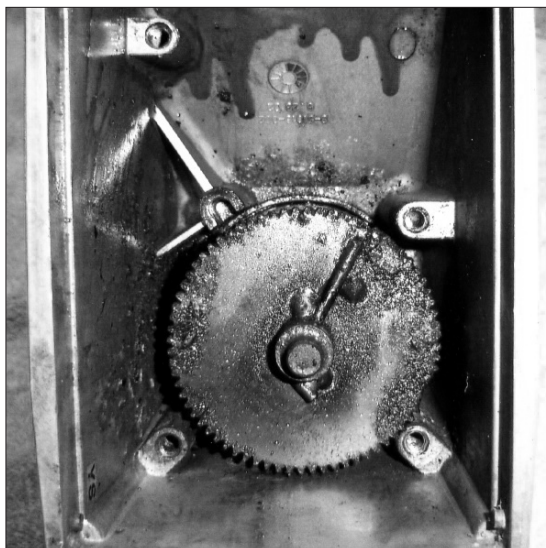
The main gear is quite corroded and has teeth missing at the 4 o'clock position in the picture. The rod that attaches the gear to the shaft and is welded in place is also visible.
